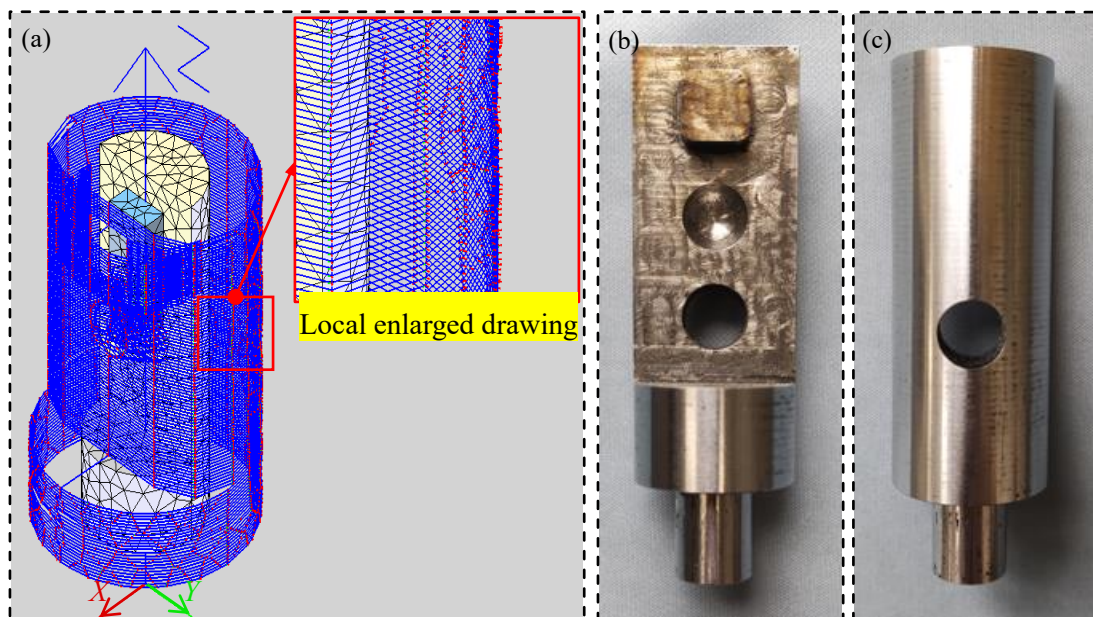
Laser cleaning of global surface on the test workpiece: (a) global path planning result of the test workpiece; (b) test workpiece after cleaning (front view); (c) test workpiece after cleaning (back view).
